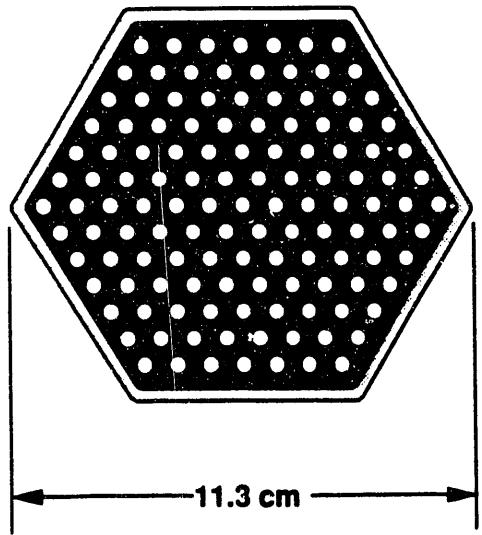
Cross section of a BN600 fuel assembly with enriched uranium fuel.
